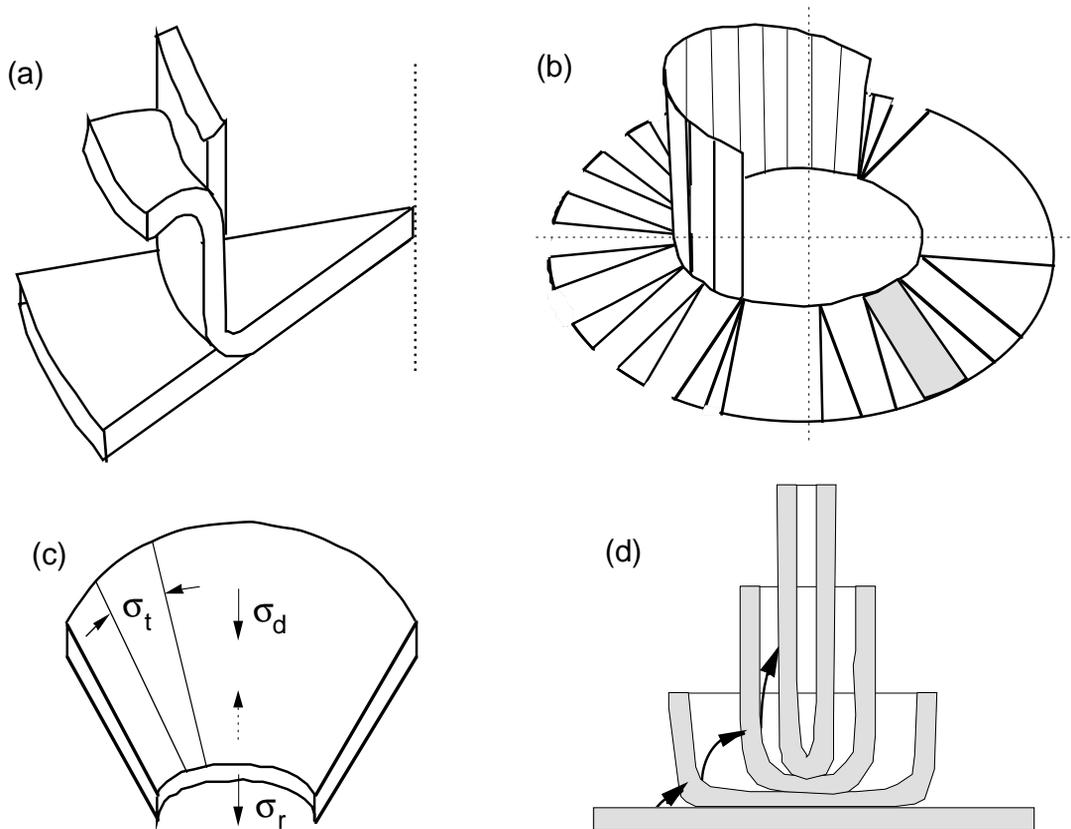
Features of a cup deep-drawing from a flat blank: a) Segment illustrating the progressive development of a cup from a blank; b) While the tube bottom remains unchanged, the tube mantle is formed by a set of rectangles among which are the characteristic triangles; c) Stresses on the flat part during drawing: σ_r is the radial tensile stress exercised by the plate center forced between punch and die, σ_d is the compressive stress exercised by the blankholder, σ_t is the stress exercised by the drawn mantle rectangles onto the characteristic triangles; d) After each redraw, the circumferential region that has been subject to bending is now only circumferentially compressed, while it is a new virgin region that will undergo bending.
